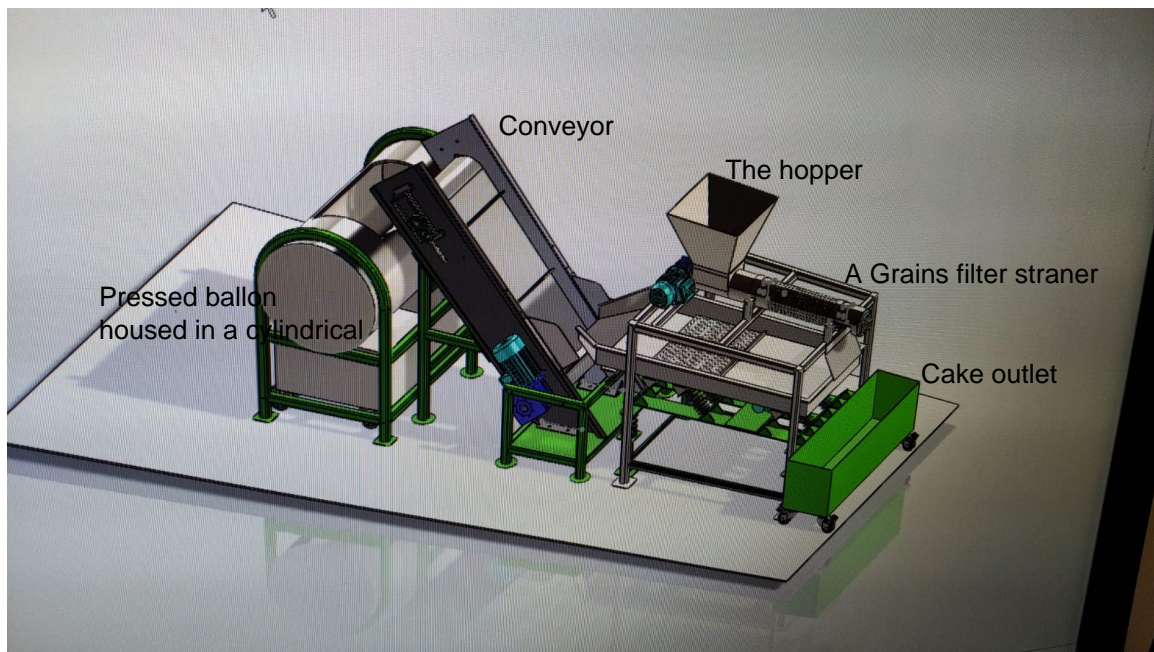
Sectional view of the grape Juice Extractor Machine
